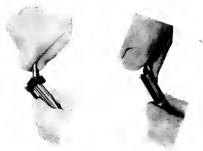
Disessemble built head E Fig. 73: Unhings extractor
